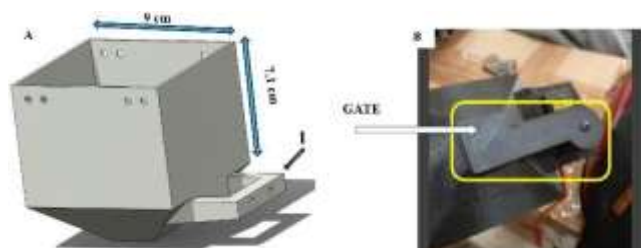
A) CAD design of the hopper for loading and dispersing seeds, B) Bottom view of the hopper for seed releases, 1) Support for the seed release mechanism.
